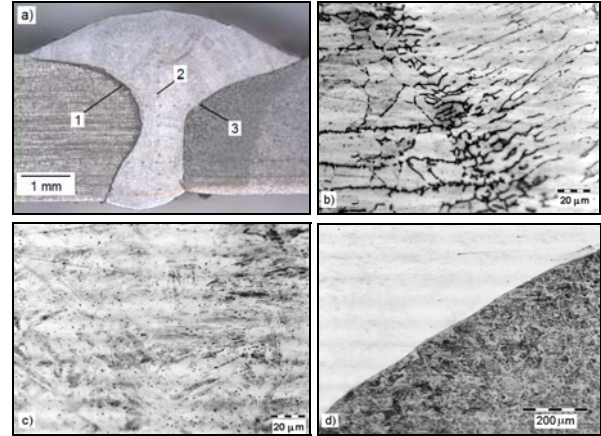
LHW of LCS-SS thin sheets: a) weld cross-section macrostructure; b) optical microstructure of the HAZ in SS and weld FZ; c) weld microstructure; d) optical microstructure of the FZ and HAZ in LCS.
